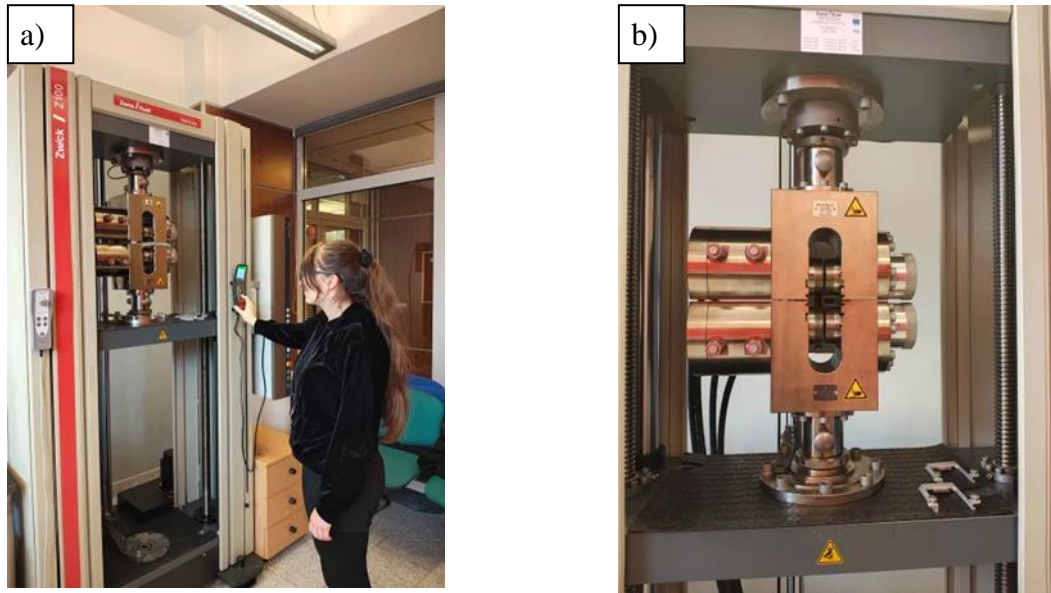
a) Zwick ZSN 100 tensile testing machine during DT-DT tensile testing of a steel joint, b) Test specimens for strength testing of brazed joints when fixed in hydraulic fixtures
